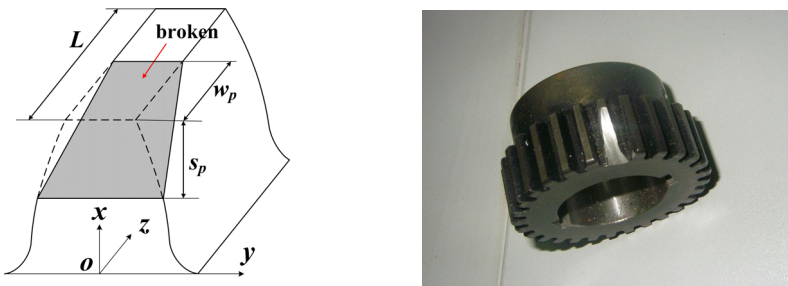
Broken-tooth fault model and physical sun-gear specimen: (a) geometric model and (b) photograph of the sun gear with a broken-tooth fault.
